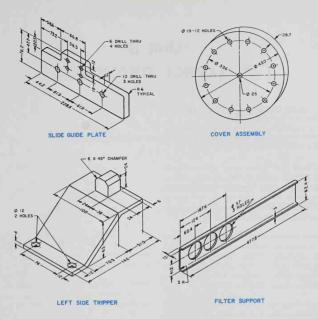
Problems for scale drawing. Dimensions are in millimetres.
